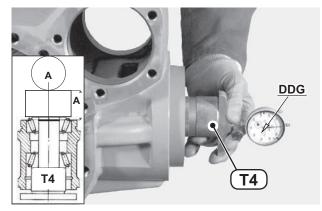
Introduce the tracer of a depth gauge "DDG" into either side hole of tool T4 (See drawing T4 p. 92). Reset the gauge with a preload of about 3 mm.
